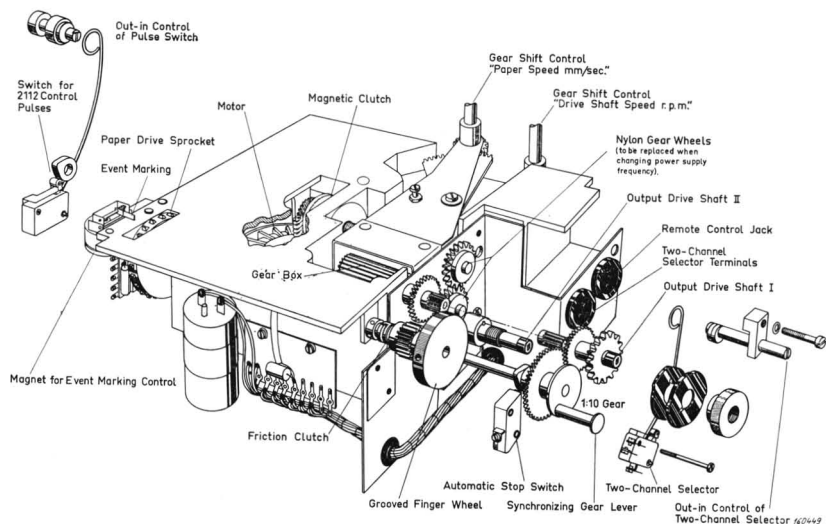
"Exploded" view of the Level Recorder mechanical system.
